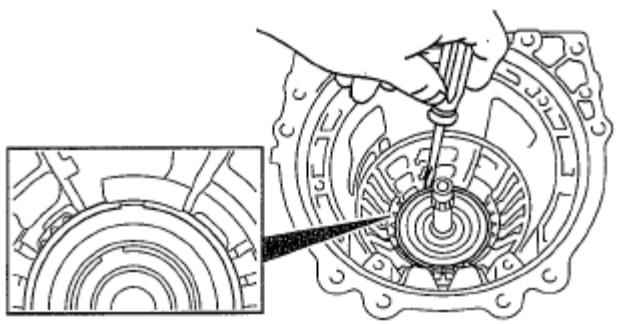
Identifying Piston Return Spring And B1 Brake Piston Component
